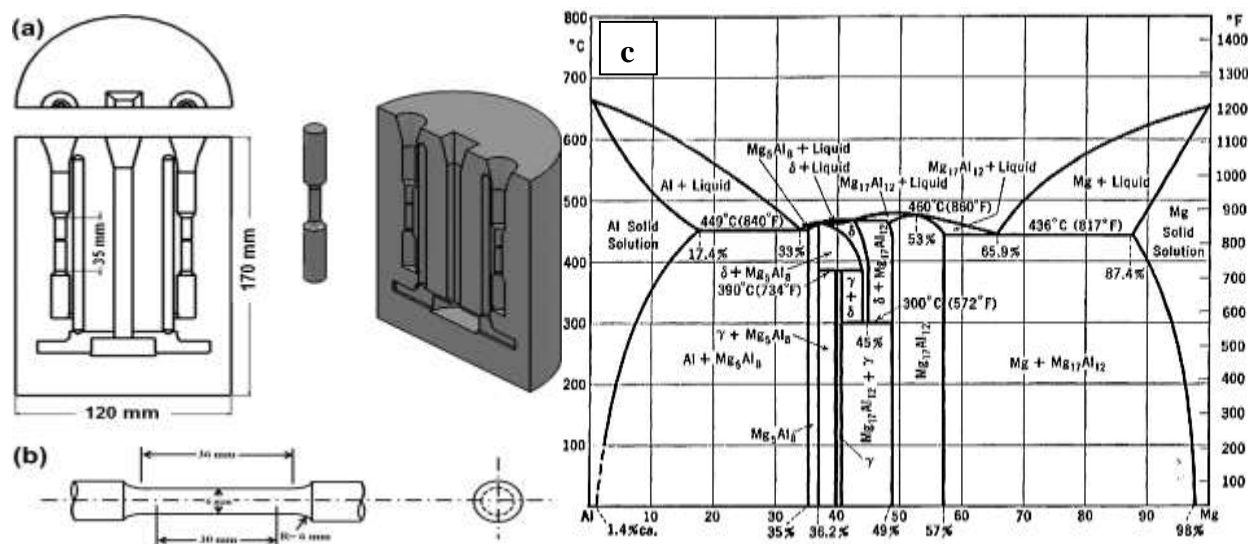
(a) Cast iron mould (b) tensile samples dimensions. (c) Al-Mg binary phase diagrams [8].
